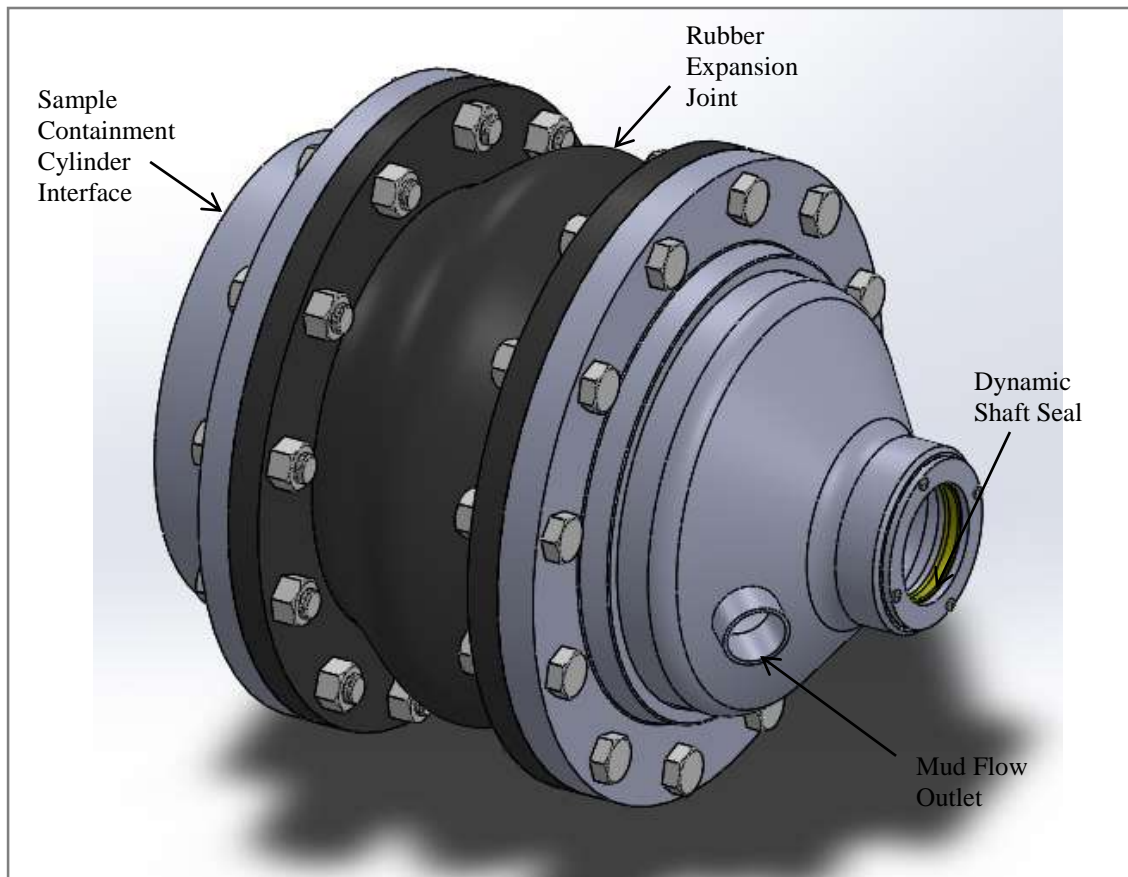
3D CAD model of formation sample mud drain assembly
